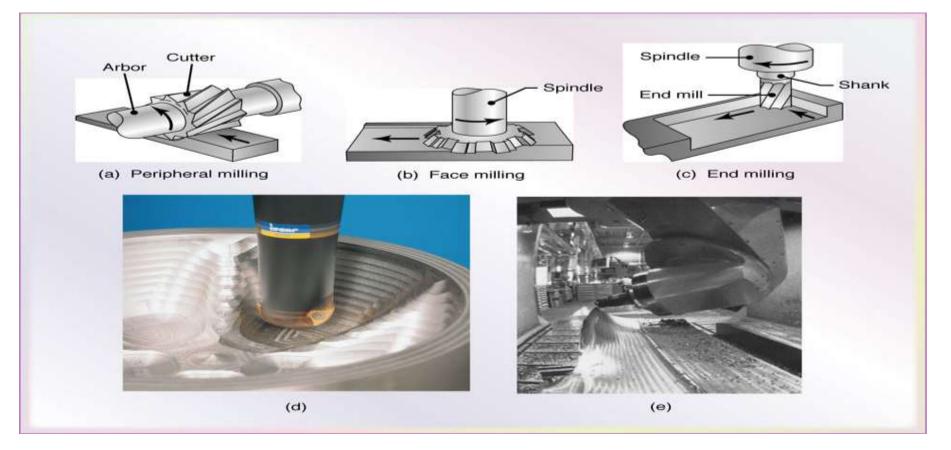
Some basic types of milling cutters and milling operations. (a) Peripheral milling. (b) Face milling. (c) End milling. (d) Ball-end mill with indexable coated-carbide inserts machining a cavity in a die block. (e) Milling a sculptured surface with an end mill, using a five-axis numerical control machine. *Source*: (d) Courtesy of Iscar. (e) Courtesy of The Ingersoll Milling Machine Co.
